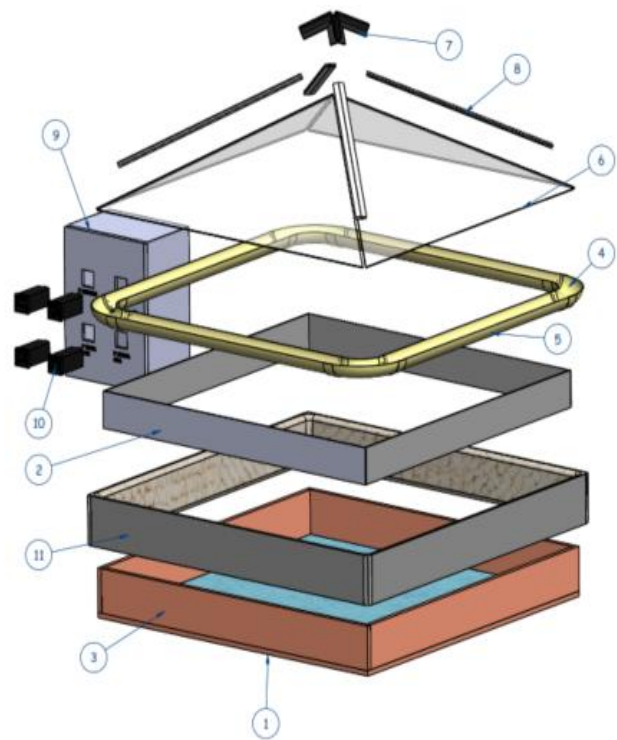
Exploded view of the pyramidal solar still designed in 3D CAD
